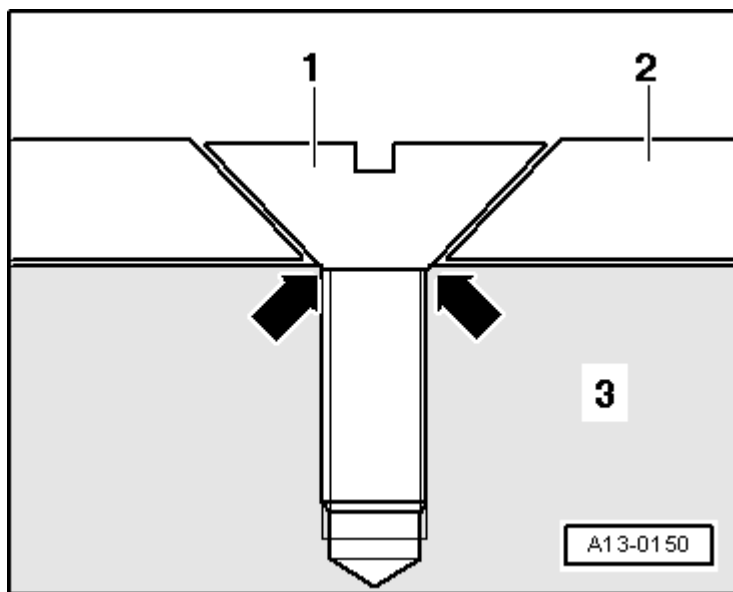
Identifying Attachment Points, Countersunk Screws, Crankshaft & Sensor Wheel
